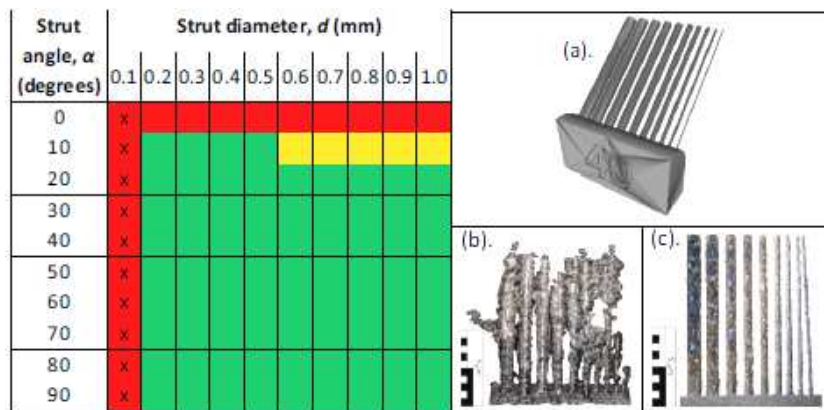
Inconel 625 cantilever lattice struts manufacturability [77]
